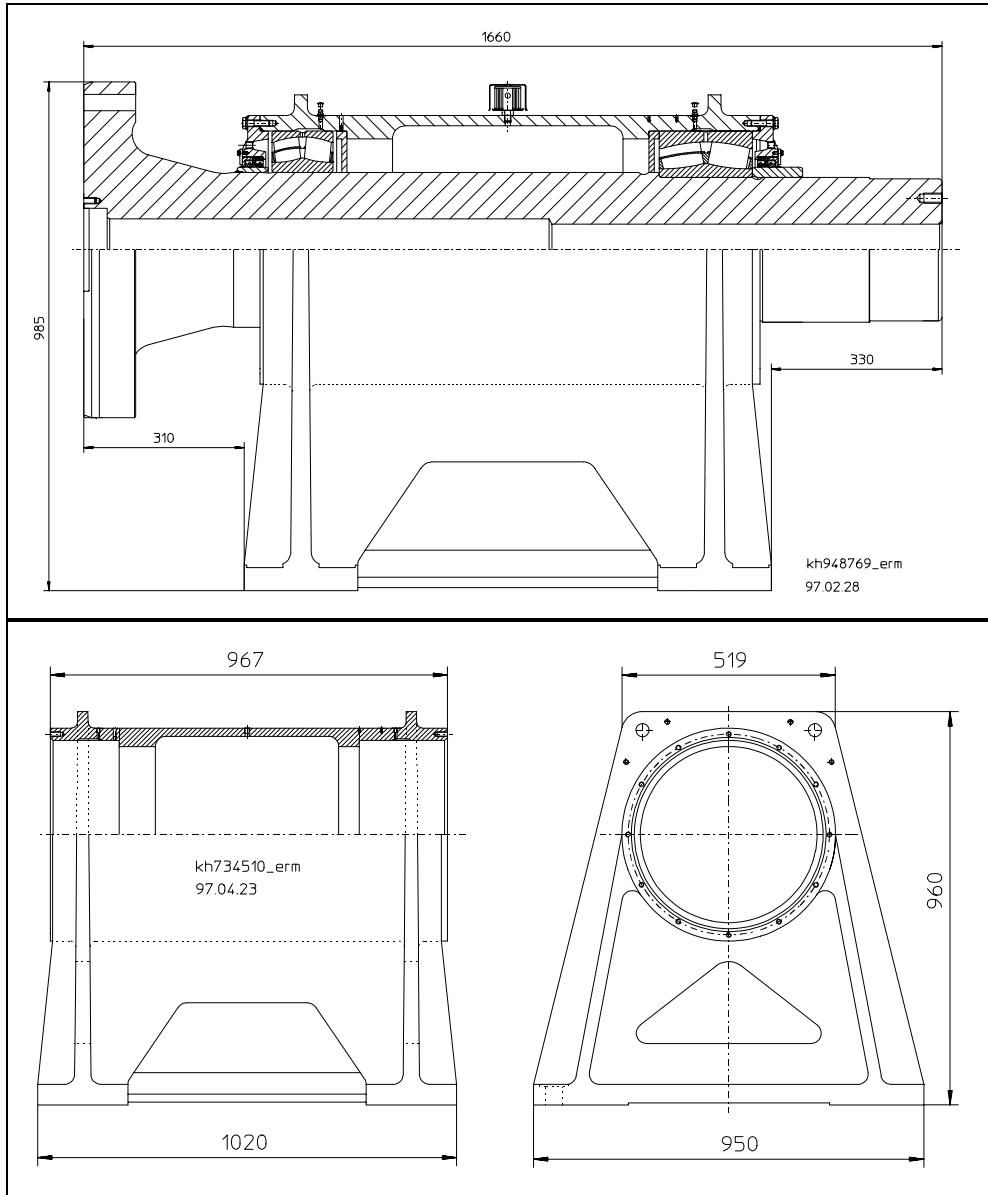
Bearing frame with main shaft and bearing arrangement for wind turbine with two main bearings; courtesy Vestas.
